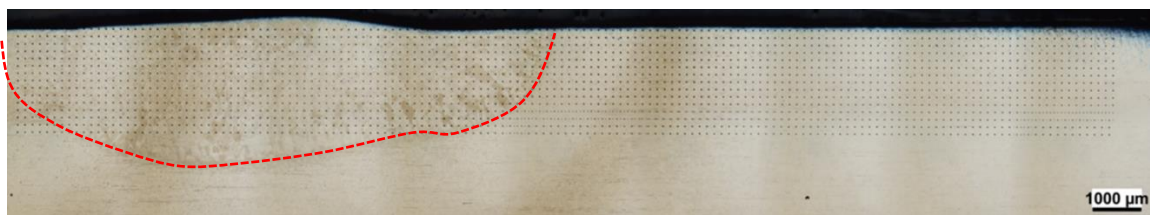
Light optical micrograph of the cross-section of the 17-4 2000 J/mm primary weld pass. Demonstrating the oblong nature of the weld pool.
